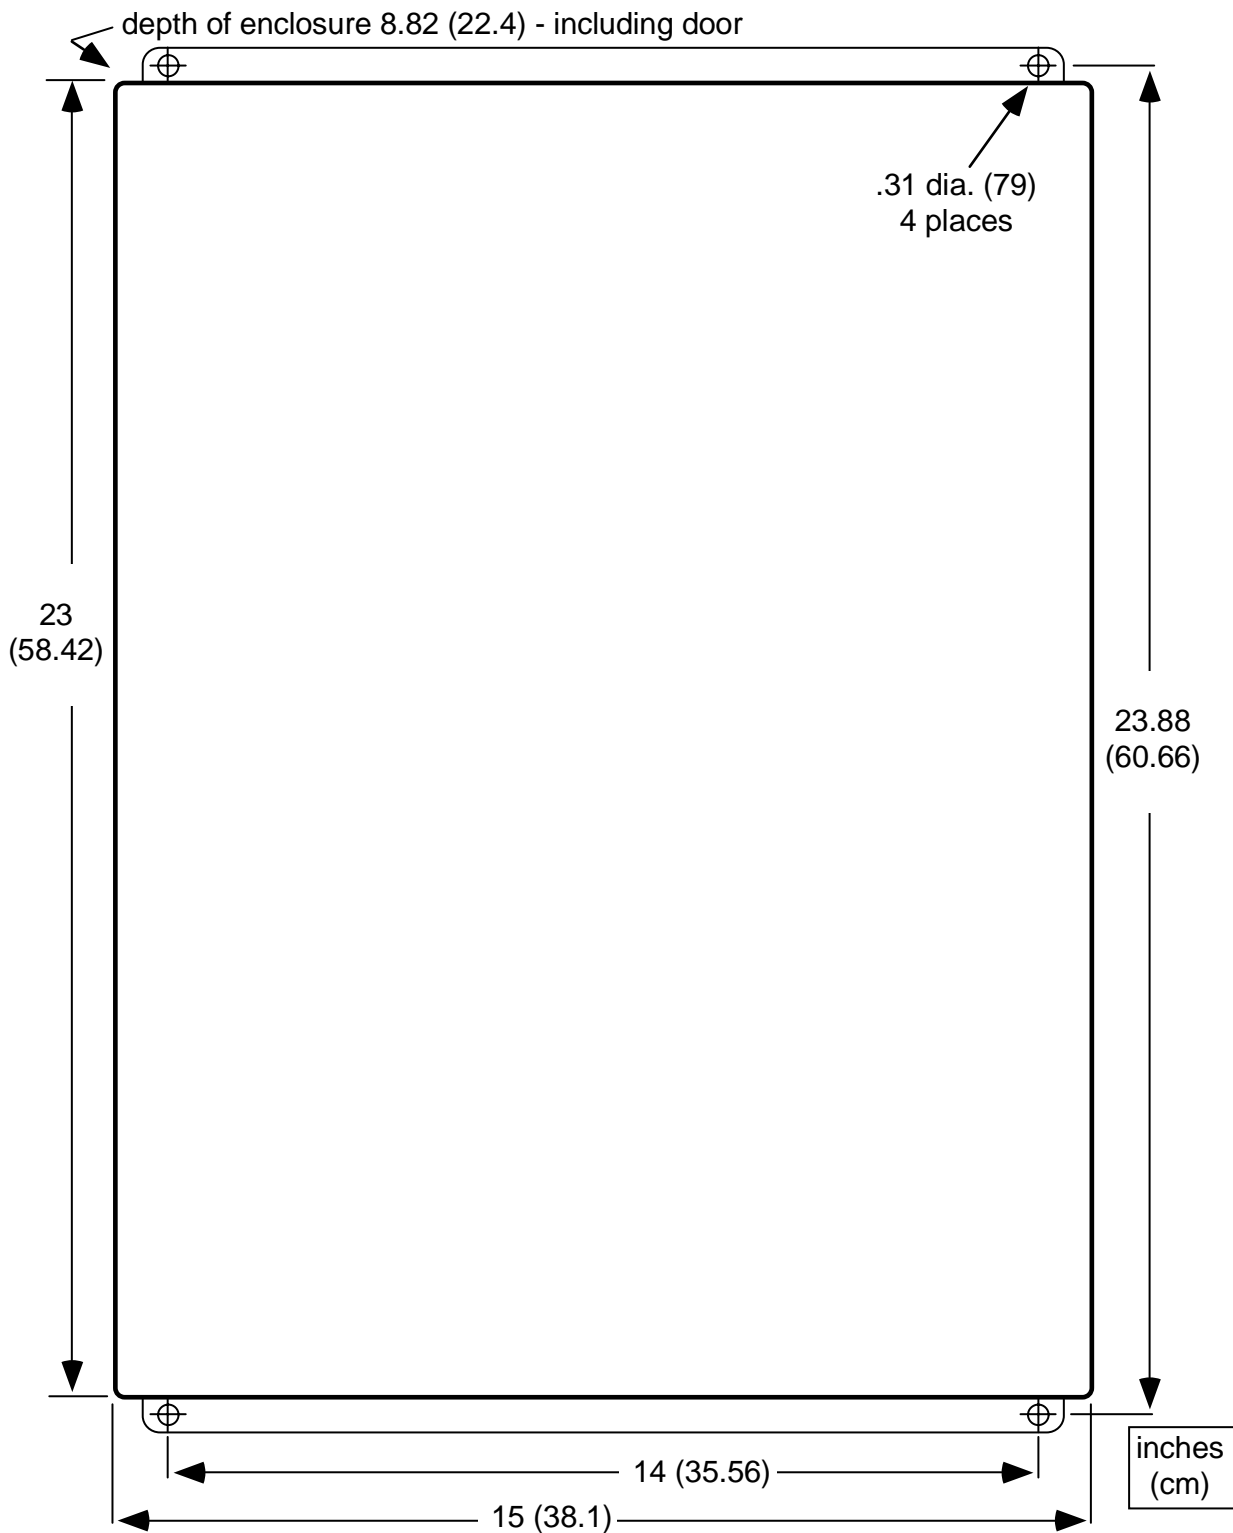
Mounting dimensions for 4-in-1 Enclosure
